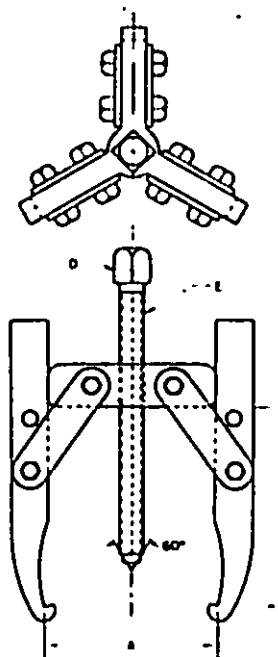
Type I, class 2, style A, puller mechanical, gear and bearing, three-jaw, external, single end grip.
